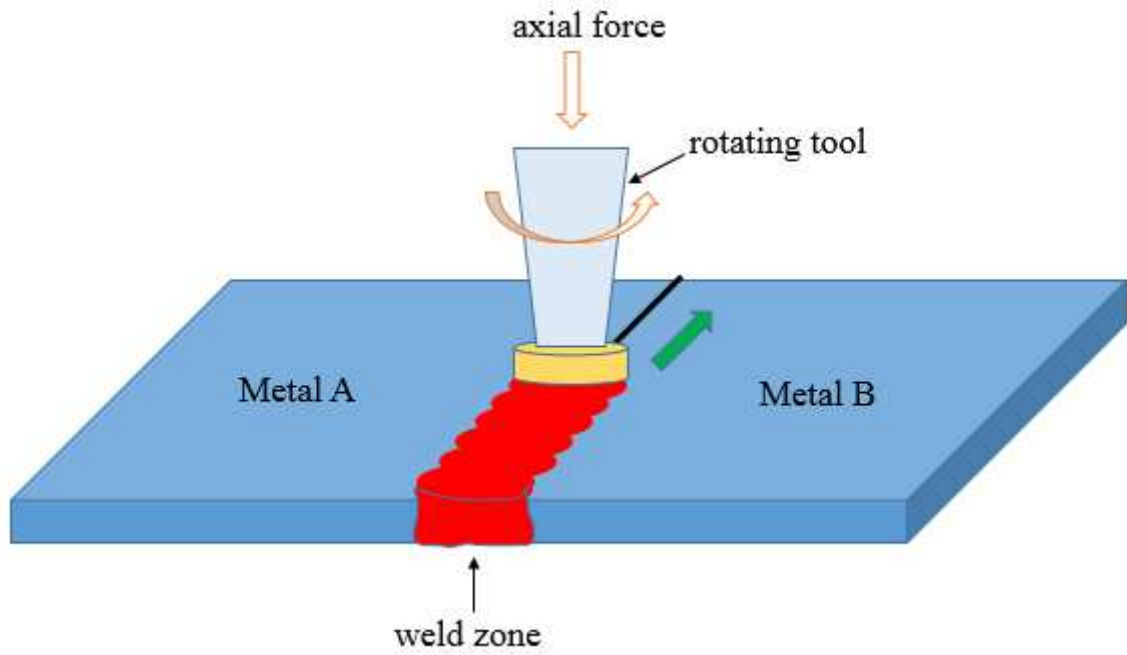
Diagram illustrating the principle of a friction stir welding process (FSW).
